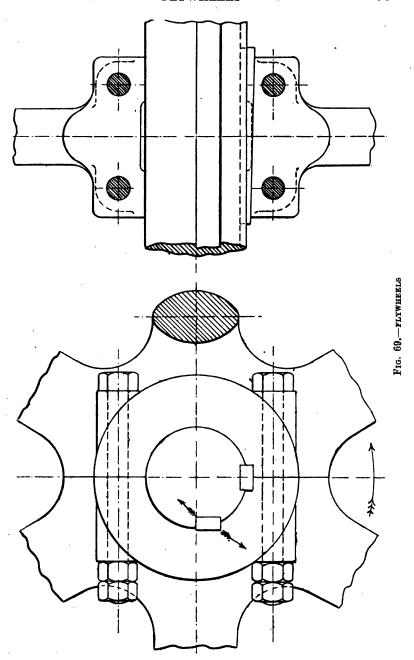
shows a special method of keying flywheels on large engines which was designed by Mr. S. Quipp, one of the staff of Robey & Co., and differs from fig. 67 in that, instead of a saddle key, a special form is used, sunk deep in the flywheel at one side, and deep into the shaft at the opposite side, the direction of running determining the deep side, the shallow side in the shaft always leading in the direction in which the engine is This key drives as a strut in the manner indicated by the arrows, the bearing surface in proportion to cross section being considerably increased, taking all the driving strain due to the pressure of the explosion, and effectually resisting the shock due to the starting impulse, which in all pressure starters is very great, the heavy flywheel having to get up the required velocity due to the force of this impulse almost instantaneously, and the inertia of the flywheel acting against this impulse causes a very severe strain on the sides of the key beds in both shaft and flywheel, the result being that it soon becomes loose when a single key is used. Flywheels over 7 feet in diameter should be cast in halves, as the greater frictional grip obtained by the bolts assists the keys in a very efficient manner.
